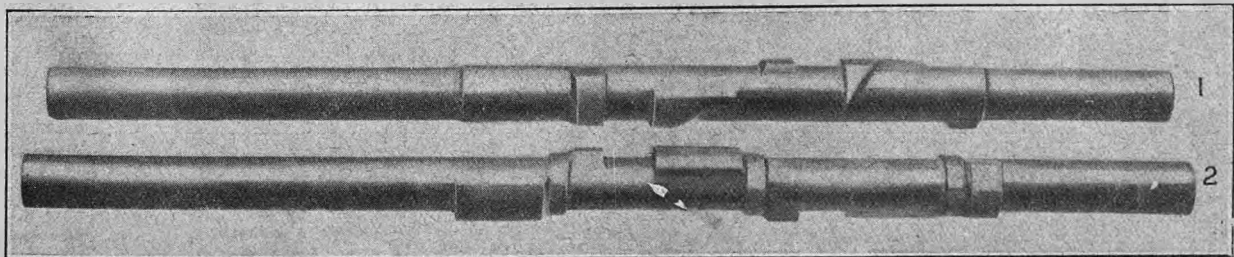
The sliding camshafts—inlet (1) at the top and exhaust (2) below.
